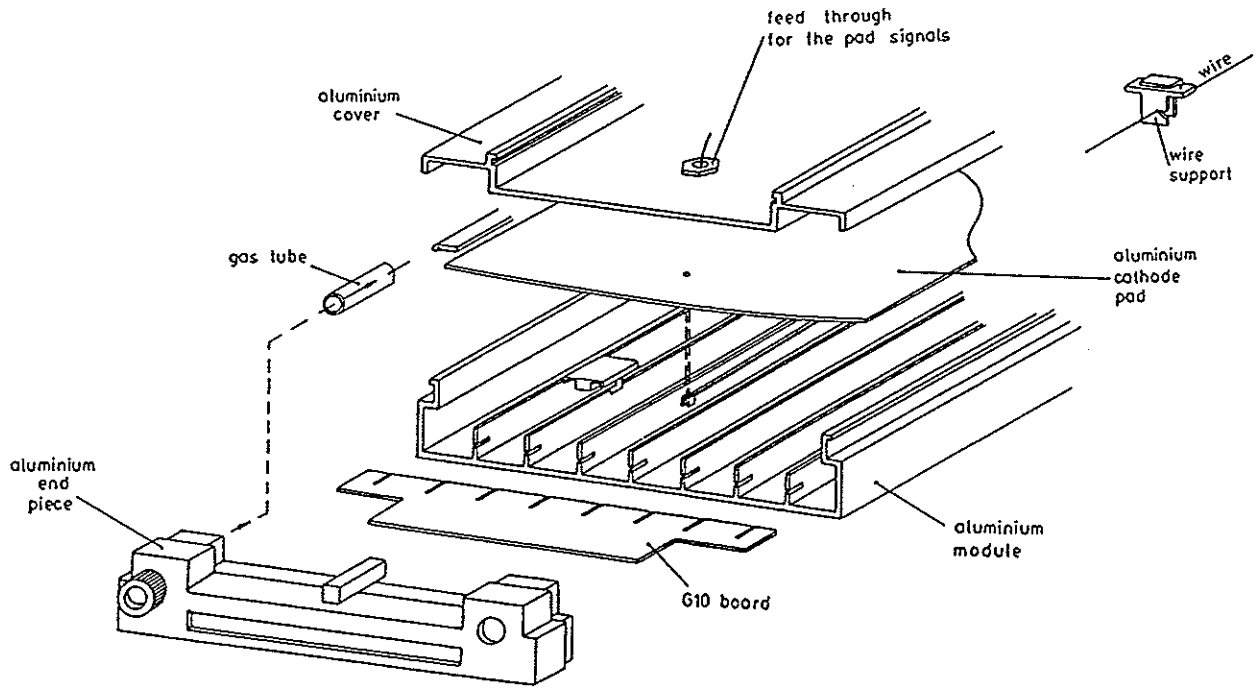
Elements of the Backing Calorimeter module assembly.
